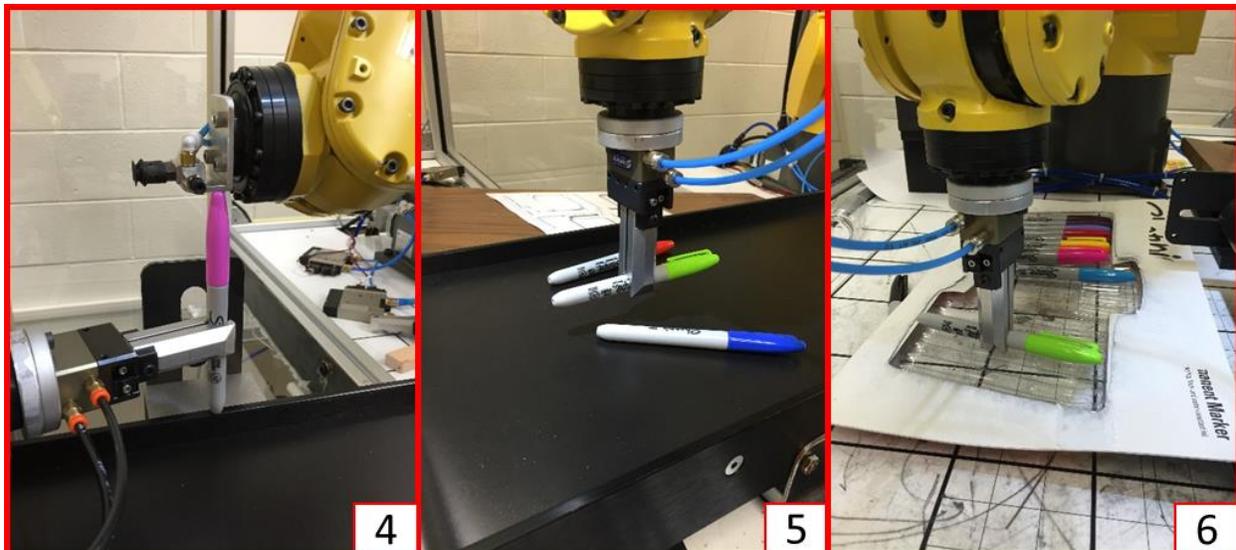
4) Robot 3 tightens the cap by pressing it on the marker 5) Robot 1 picks the assembled marker 6) Robot 1 places the assembled marker on the tray
